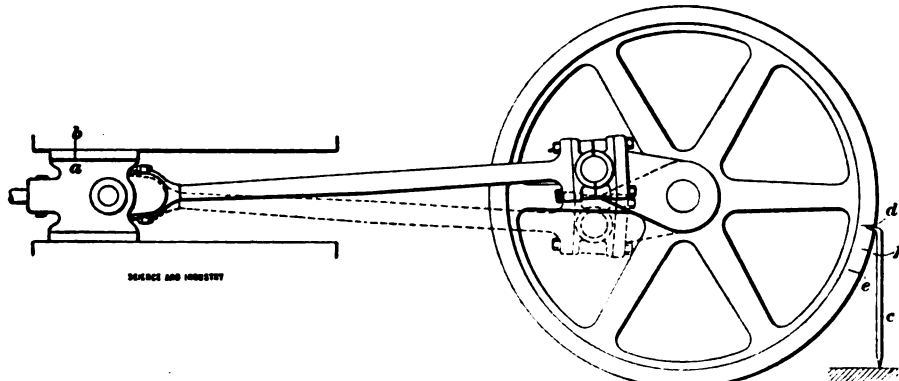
METHOD OF PLACING CRANK UPON DEAD CENTRES.
